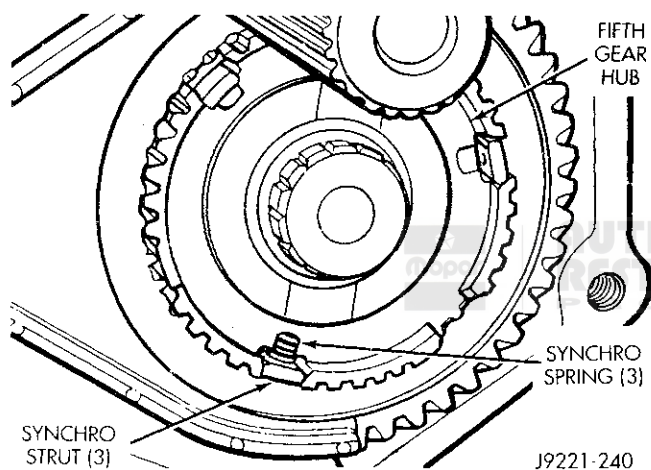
Installing Fifth Gear Synchro Struts And Springs
